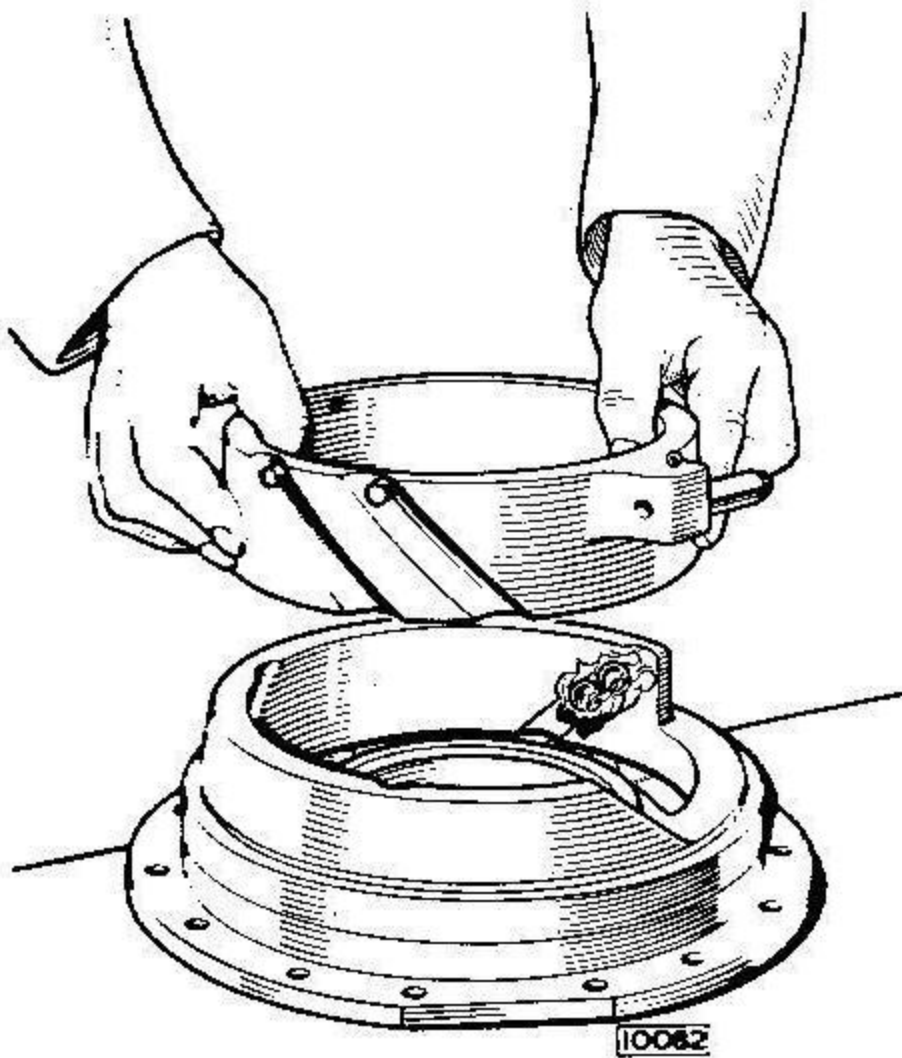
Fitting the top gear thrust ring to the inner actuating ring
